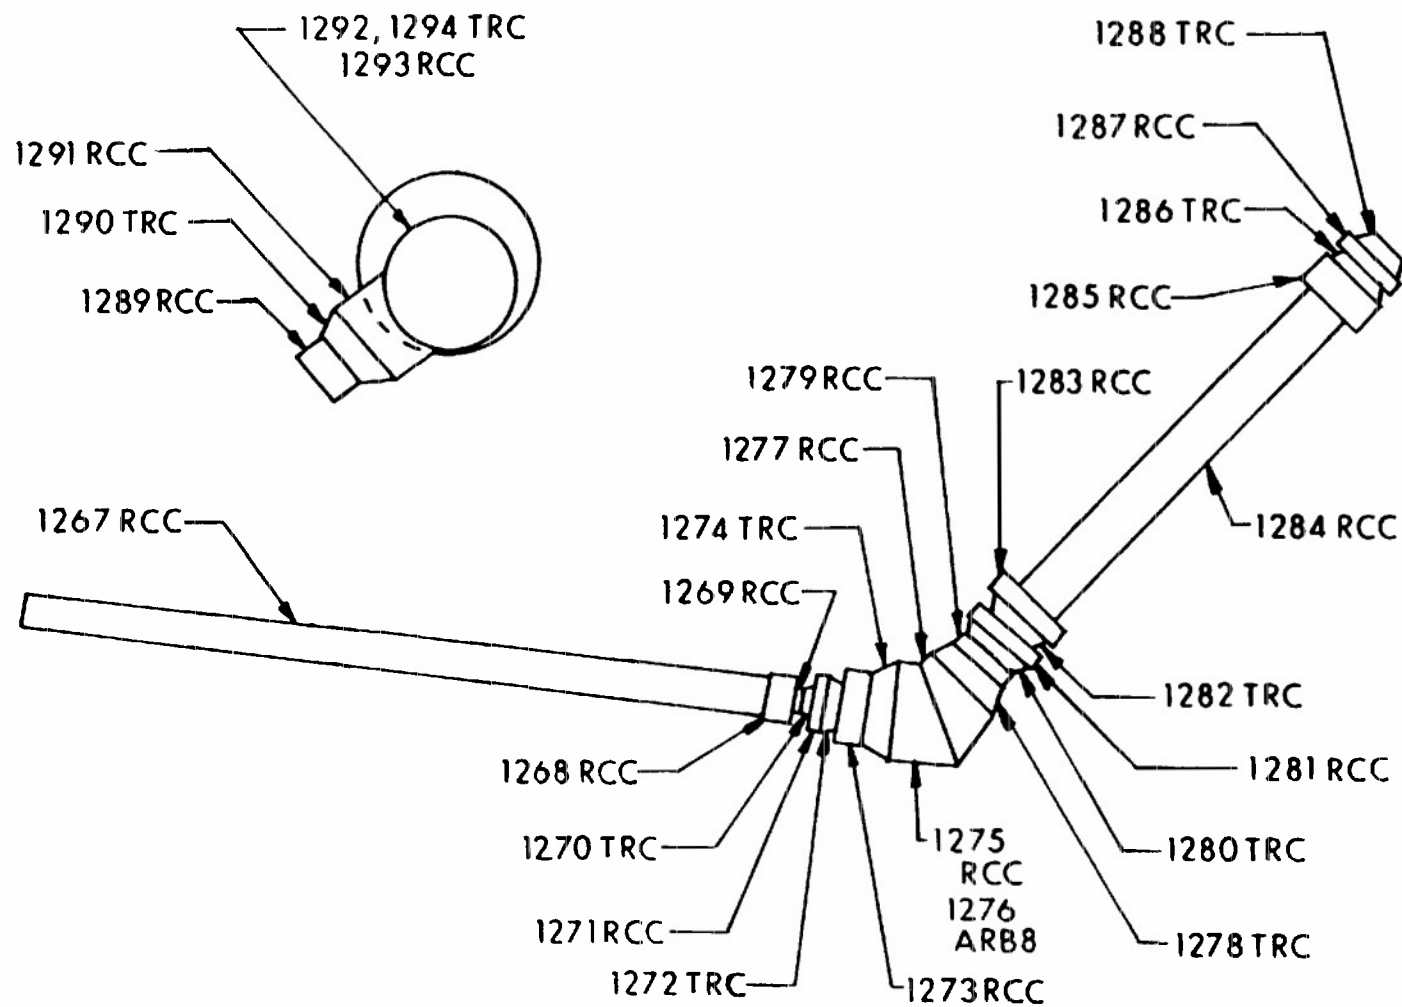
Solids Used to Describe the Rear Tail Rotor Drive Shaft Components of the Black Hawk.
